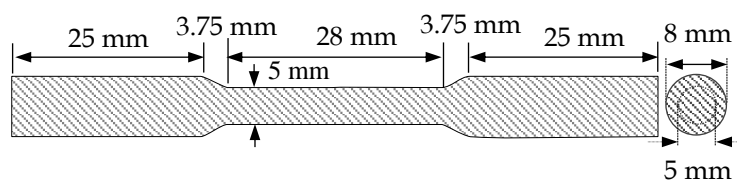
Side view and cross-sectional view of circular tensile test coupon
